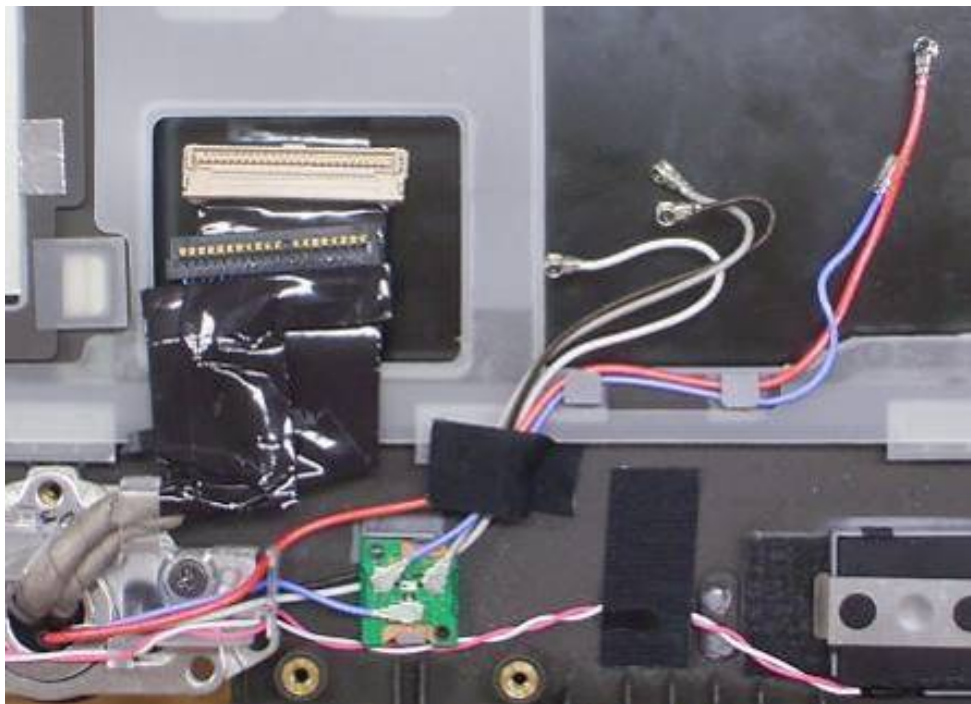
Removing the hinge assembly (1) (3G model only)
